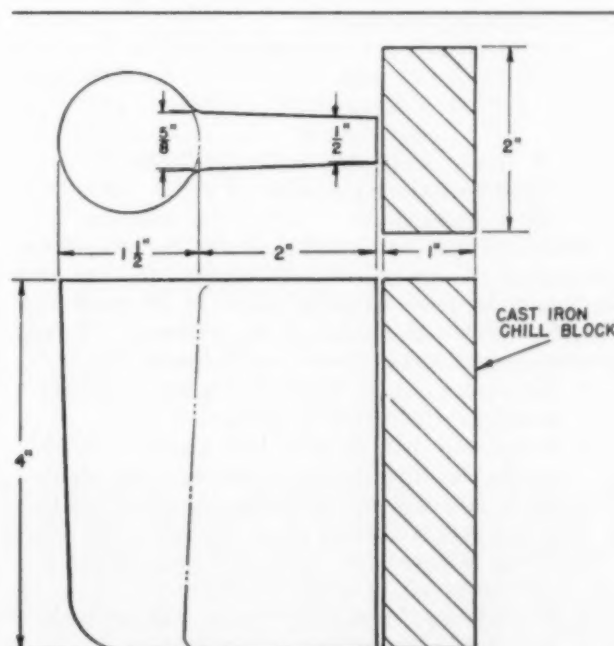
Keyhole type chill test specimen showing relative position and dimensions of chill block.
